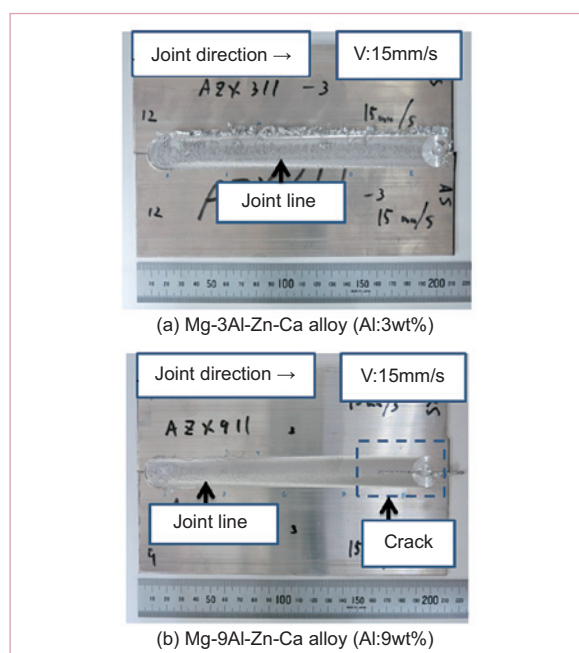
An appearance of a flame-resisting magnesium alloy for friction stir welding (joining speed: 15mm/s)
